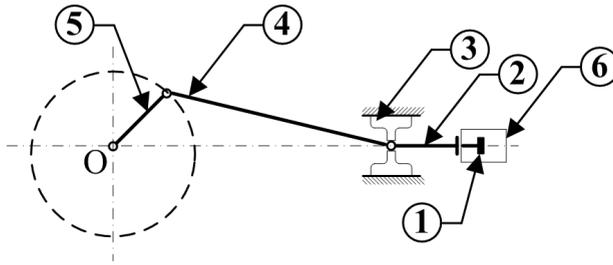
Crank mechanism system; 1 – piston, 2 – piston rod, 3 – slider (bolt), 4 – connecting rod (connector), 5 – crank shaft, 6 – cylinder of the piston
